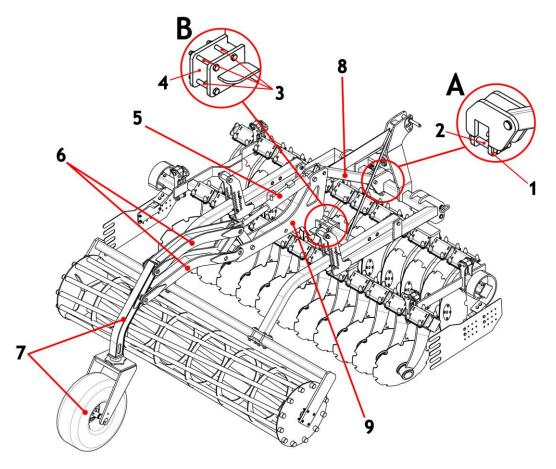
Representation of the attachment points of the 'Skorpion' type trolley to the disc harrow frame (5 - trolley actuator, 6 - trolley arms, 7 - wheel with handle and arm, 8 - beam, 9 - turret)
